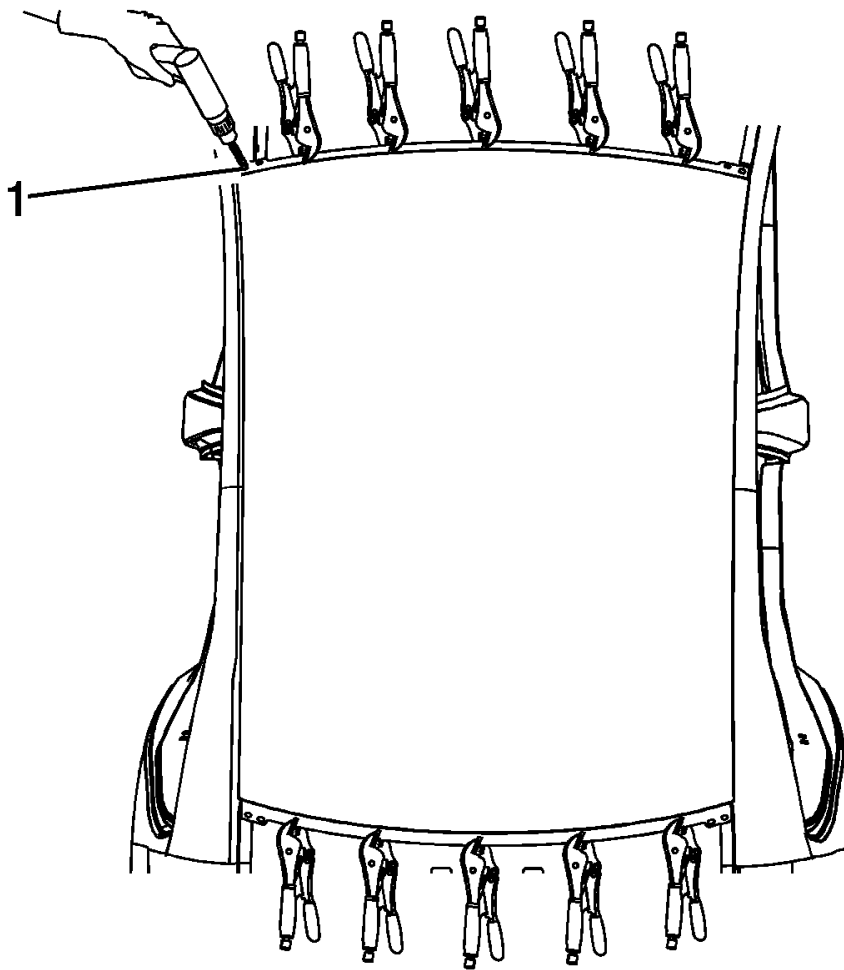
Drilling 3.2 mm (1/8 in) Hole In Each Corner Of Panel
